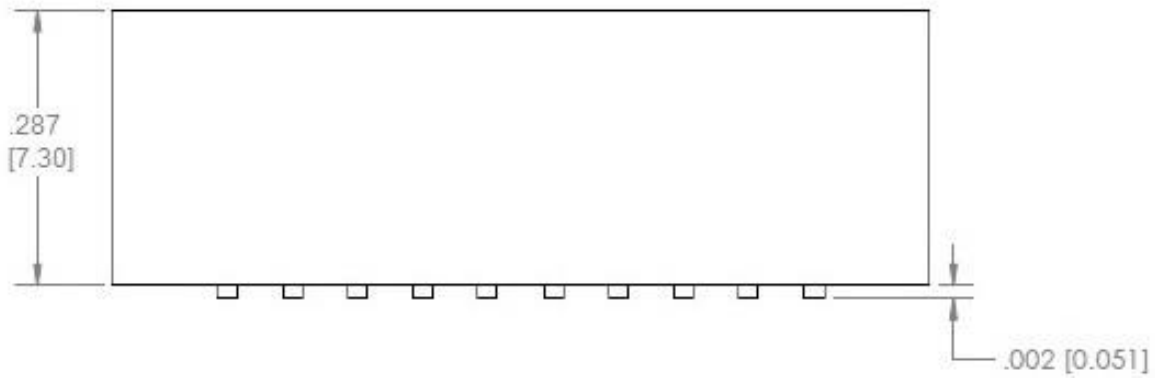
Pin header physical dimensions (dimensions are in inches [millimeters])
